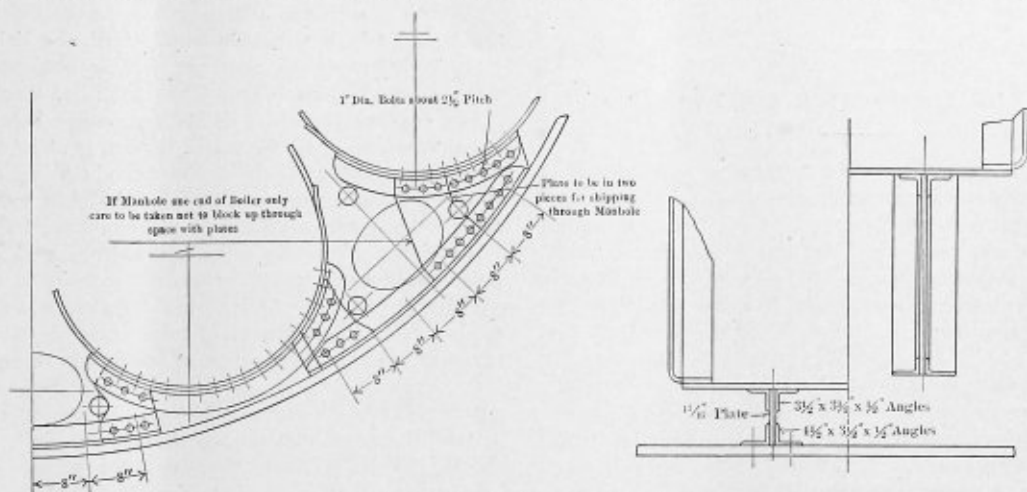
STAYING THE BOTTOM OF FIREBOXES.
